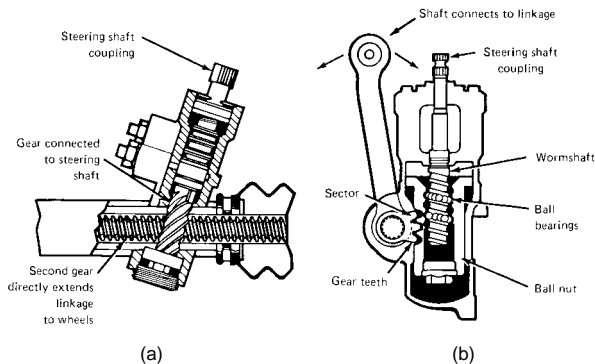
Two commonly used types of steering gears. (a) Rack-and-pinion; (b) recirculating ball.
